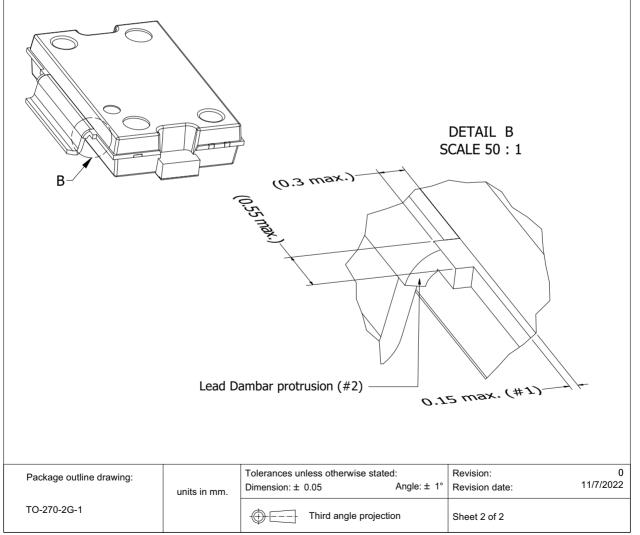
Package outline TO-270-2G-1 (sheet 2 of 2)
